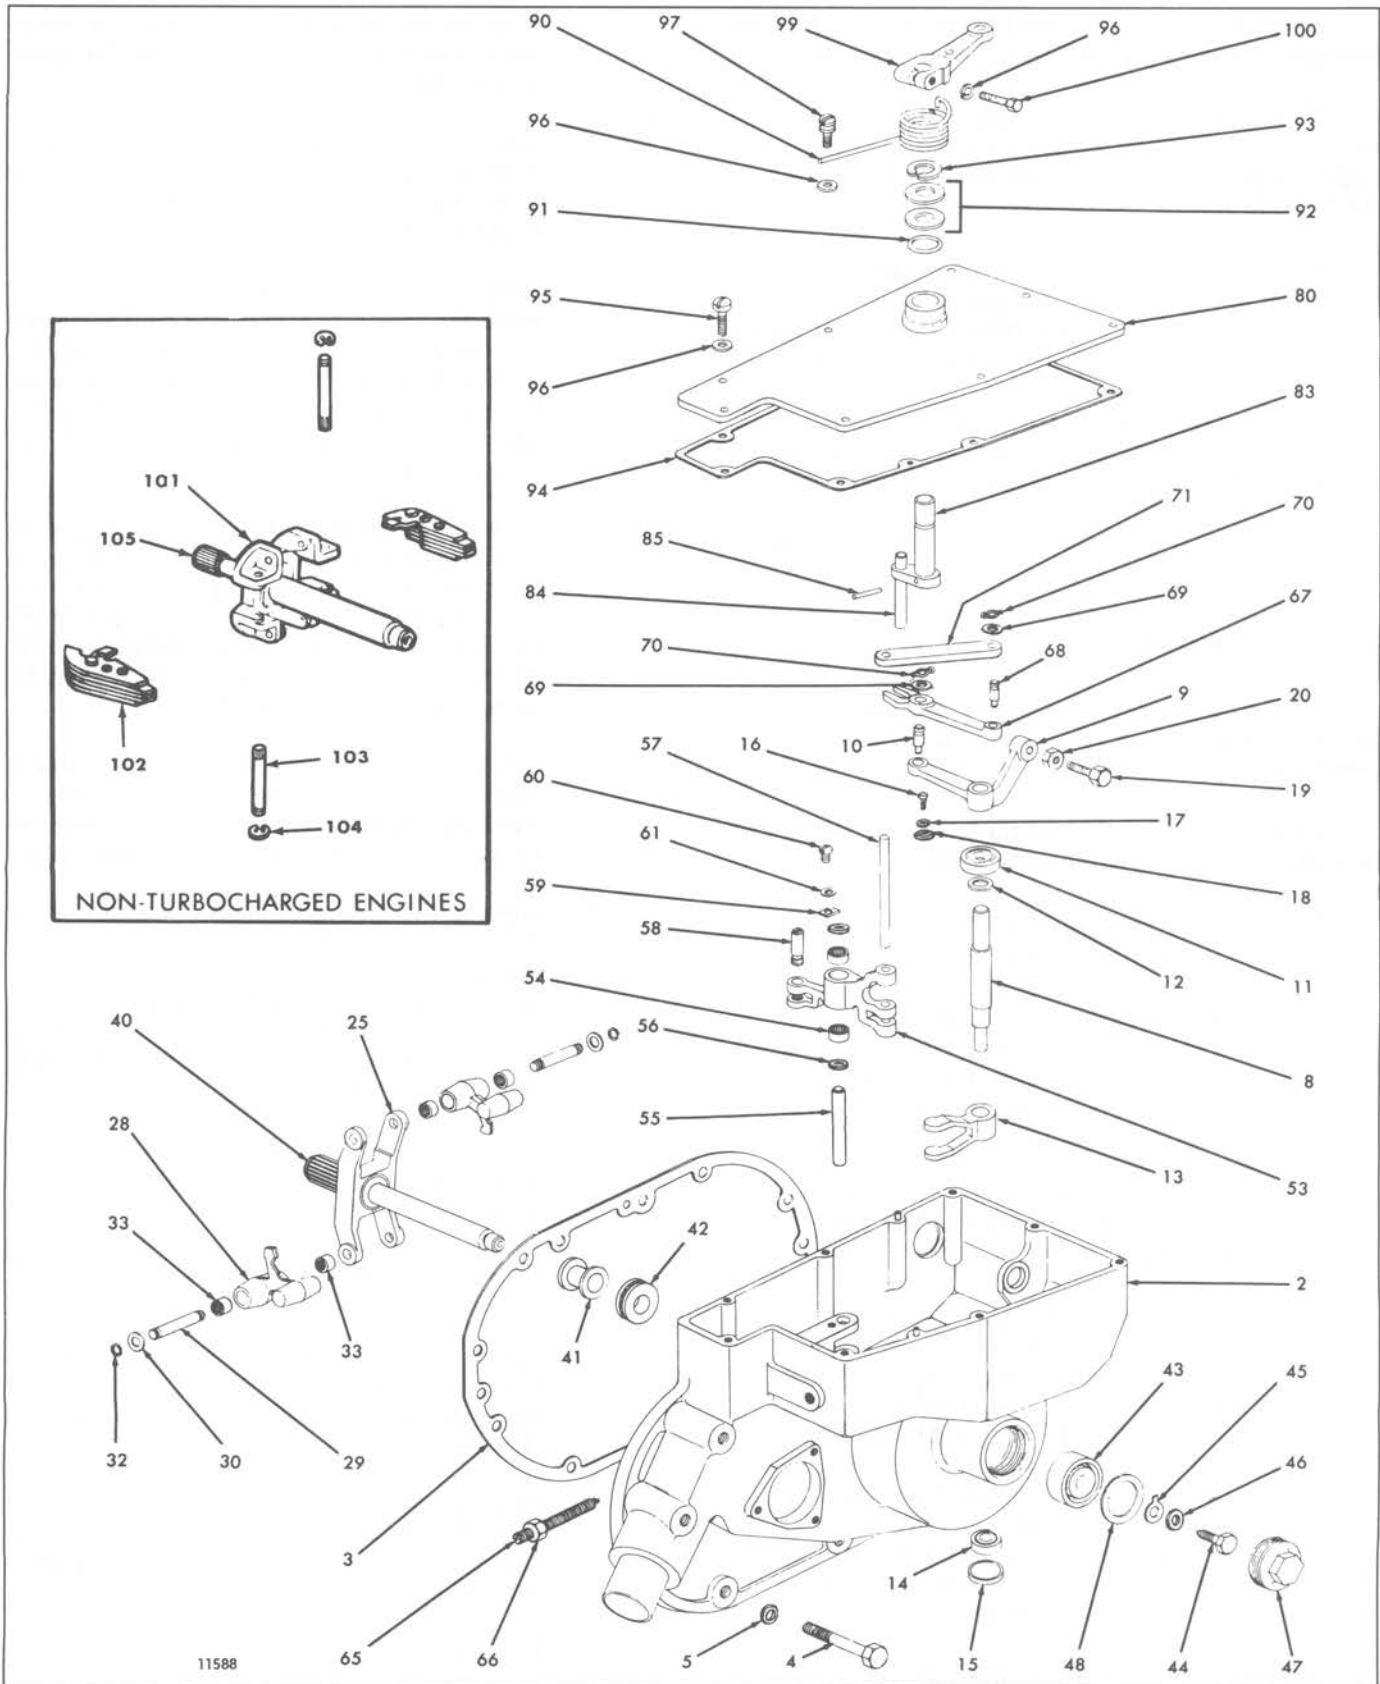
Variable Speed Governor Details and Relative Location of Parts
